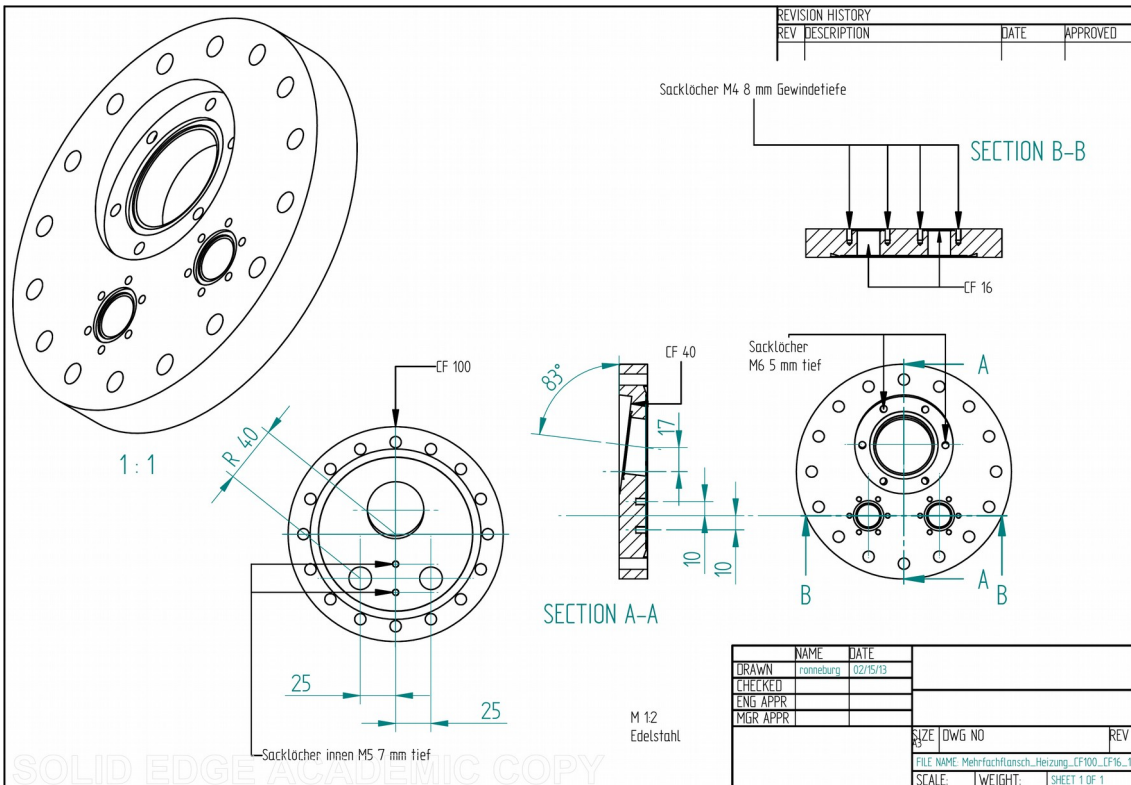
Flange, to connect heater, transfer rod and view port with TPD flange cross.
